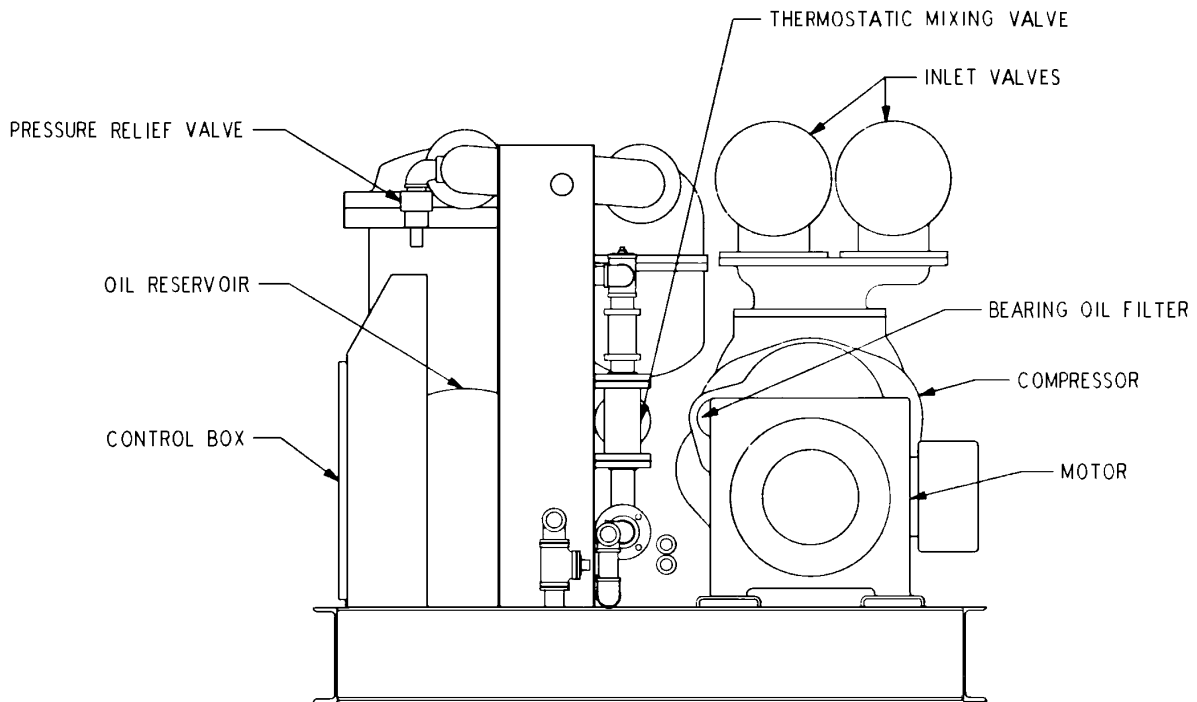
VIEW OF WATER COOLED UNIT WITH AFTERCOOLER (LESS ENCLOSURE) – MOTOR END
